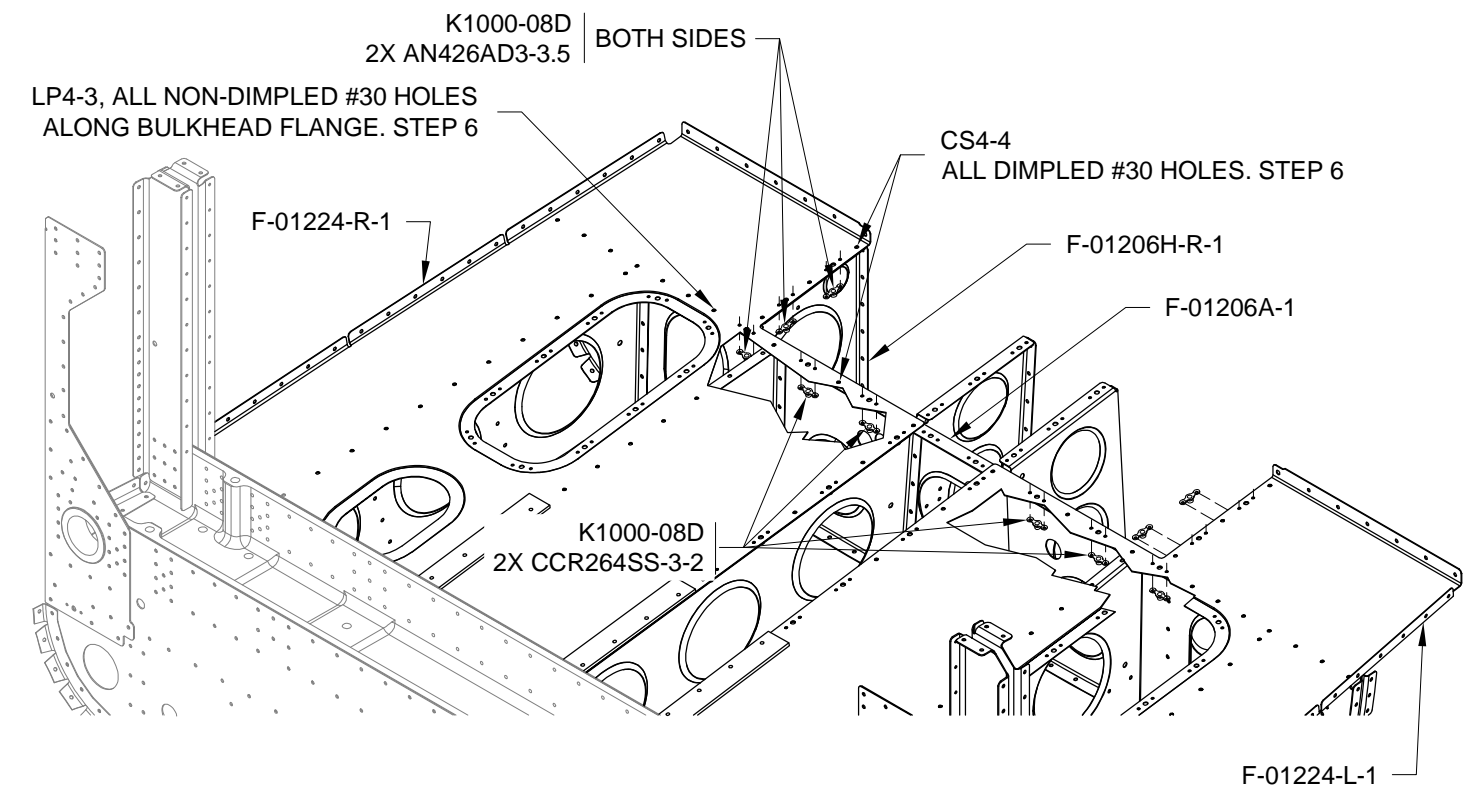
RIVETING NUTPLATES TO F-01224-L-1 & F-01224-R-1
